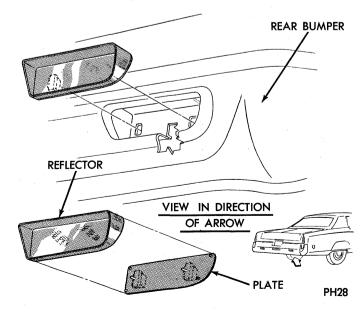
Rear Bumper Reflex Lamp, Carline C (New Yorker Brougham)
